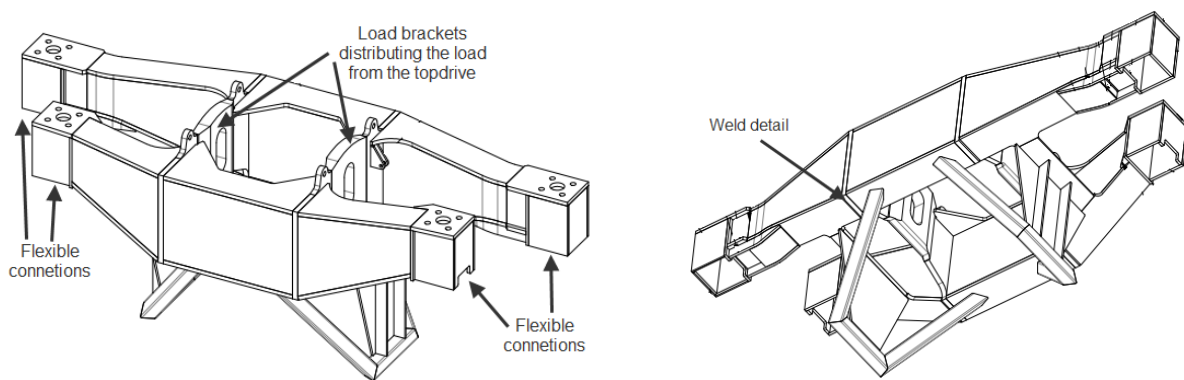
3D beam with the load points, location of weld detail and graphical display of the plates welded together
